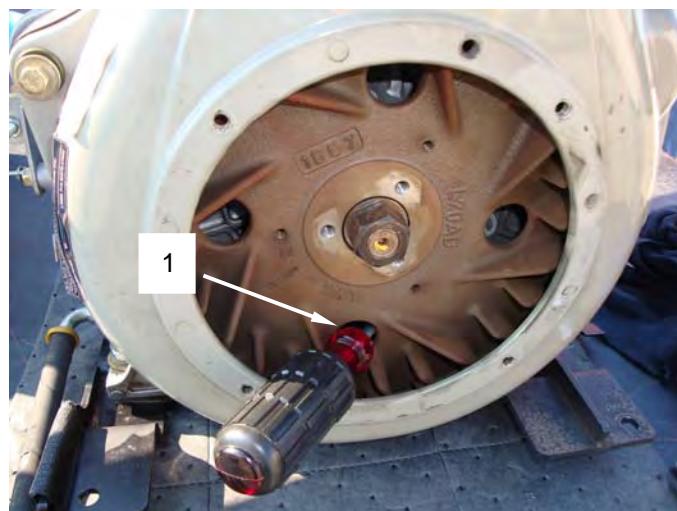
Align Large Hole In Flywheel with Matching Hole in Engine Block.
